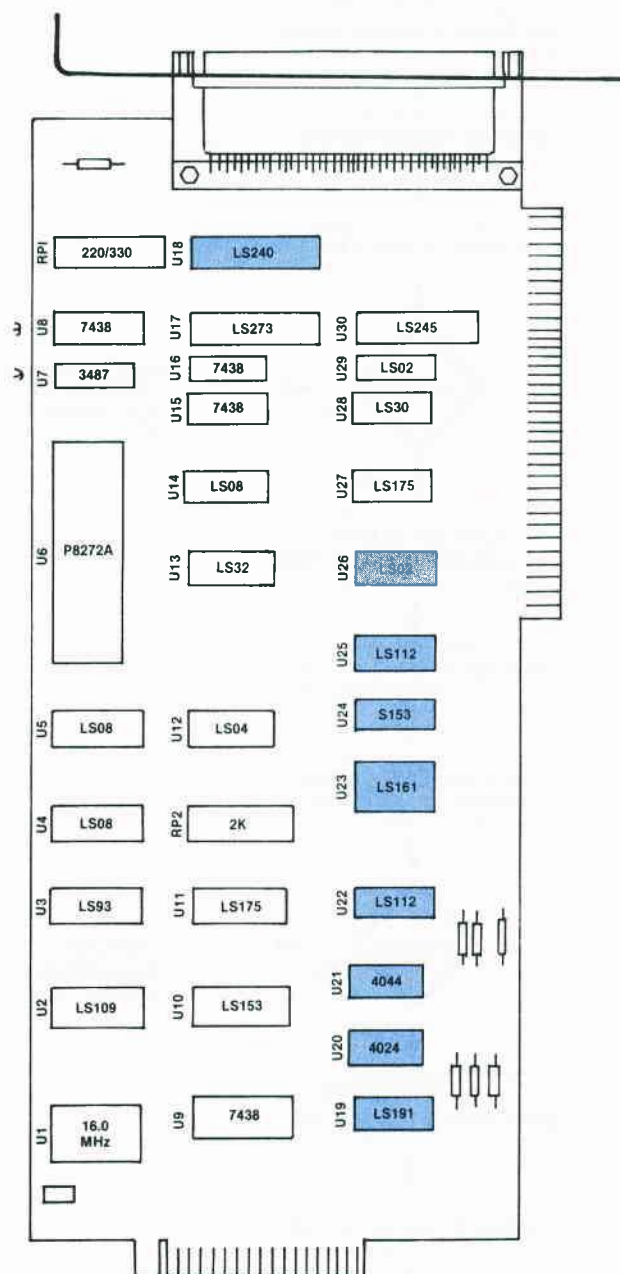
Chip location guide. This represents the IBM PC disk drive adapter card and is a guide to help you find the chips of interest.
